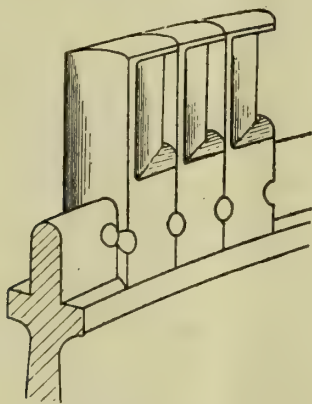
METHOD OF FIXING THE SHORT BLADES OF A FRASER AND CHALMERS TURBINE.
